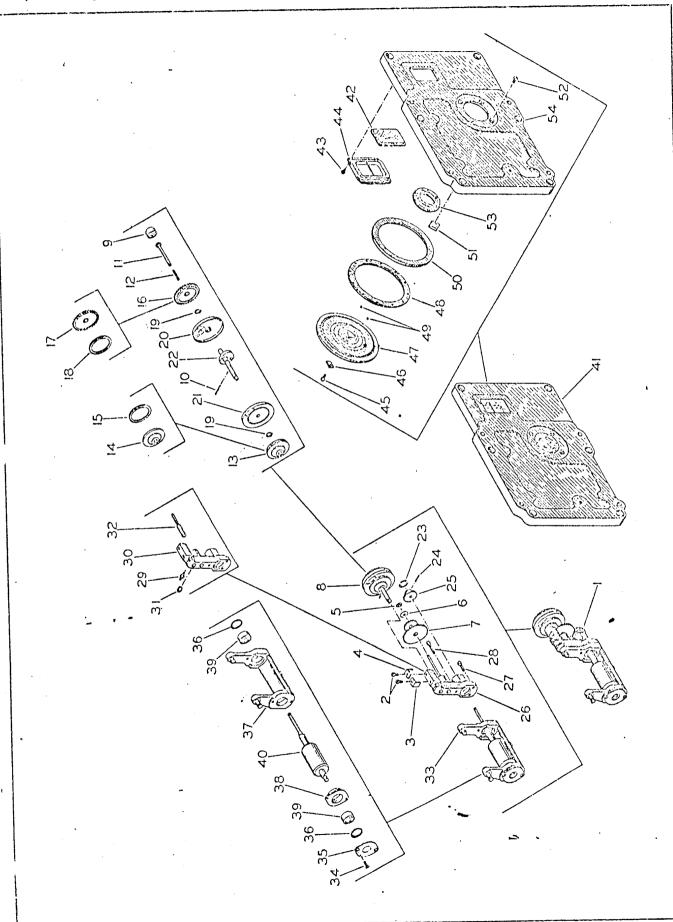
Averager Yoke and Index Assembly and Mounting Plate Assembly
